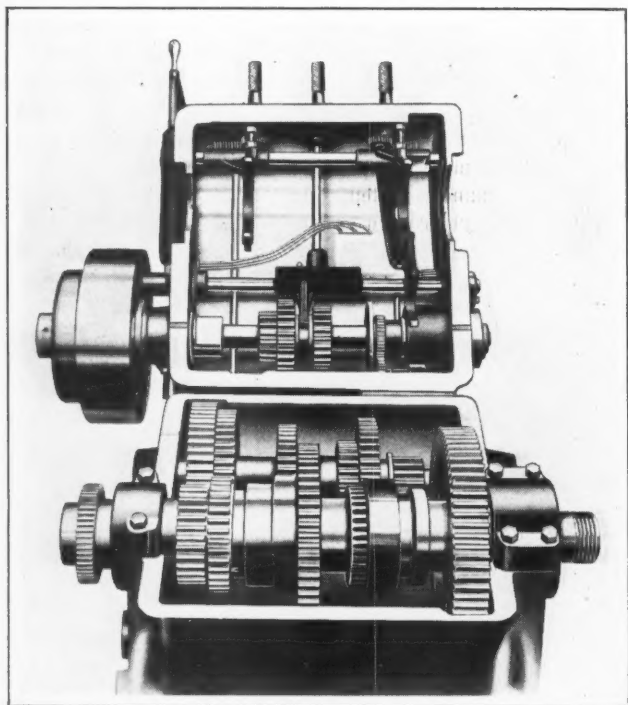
View of the Geared Head with the Cover raised to show the Gears and Oiling Arrangement
